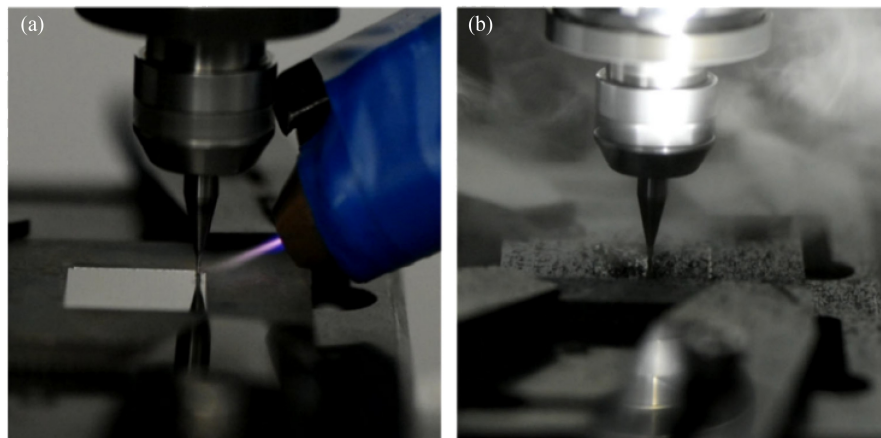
Machining process of Inconel 718: (a) cold plasma-assisted micro-milling and (b) minimum quantity lubrication-assisted micro-milling. Reproduced with permission from Ref. [125] from Springer Nature.
